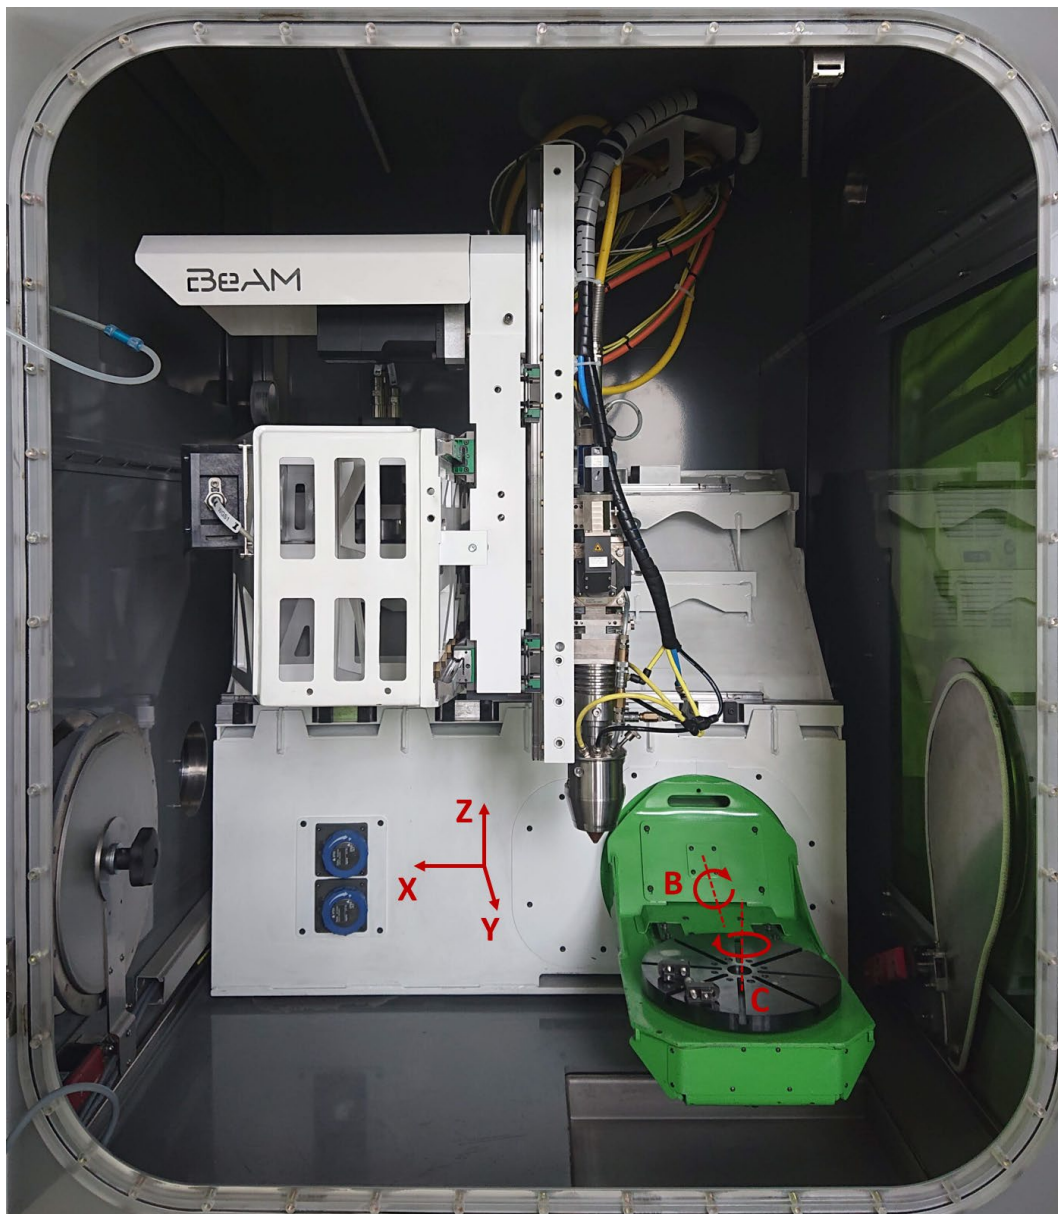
Processing chamber of the DED machine BeAM Mobile 1.0.
